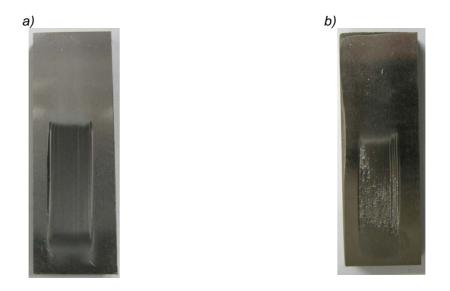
The view of samples after the wear test: a) S355J0 steel, b) Ni-WC coating
